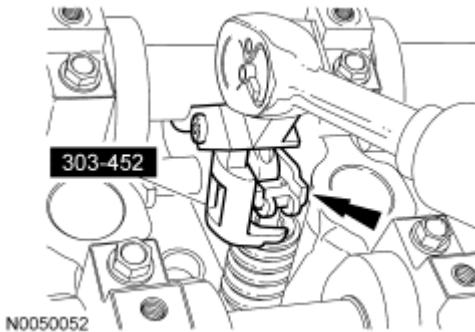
Compressing Valve Spring & Removing Valve Spring Retainer Keys Using Special Tool (303-452)
